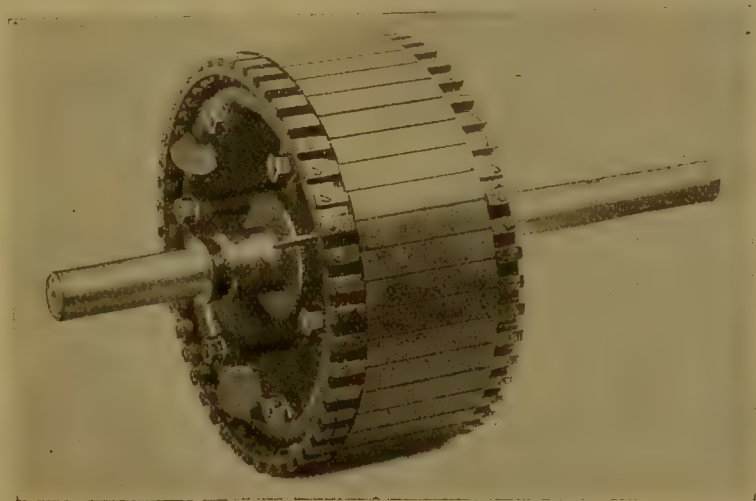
B. T. H. Squirrel-Cage Rotor.
